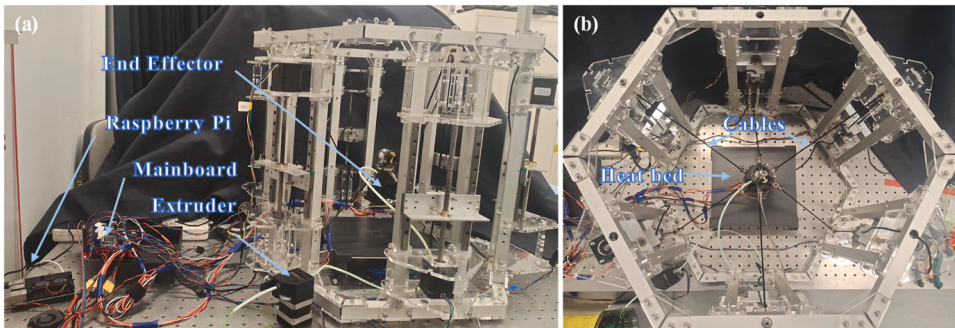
(a) Overview and (b) top view of the cable-driven robot prototype for AM.
